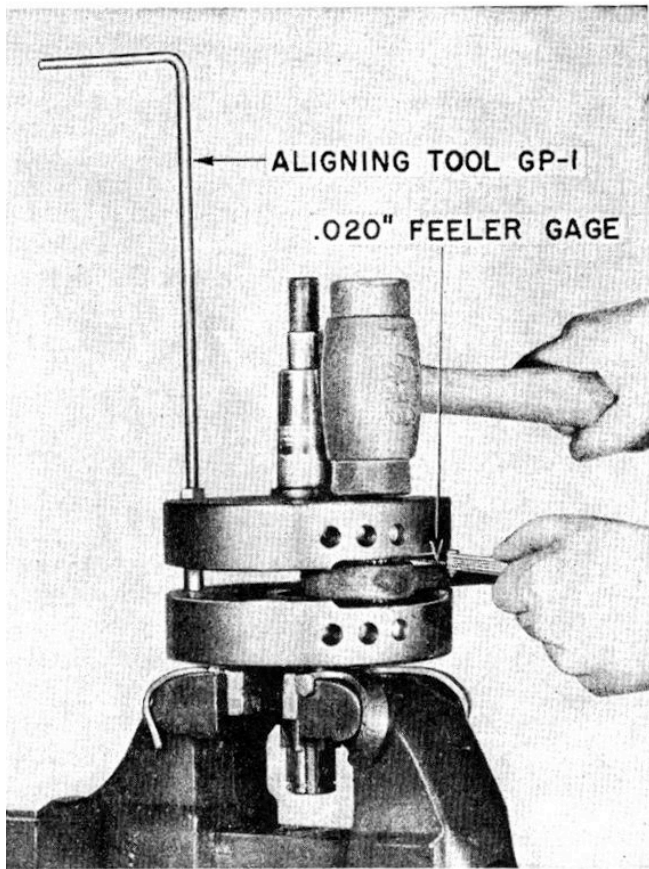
MEASURING CLEARANCE BETWEEN CONNECTING ROD AND THRUST-WASHER
